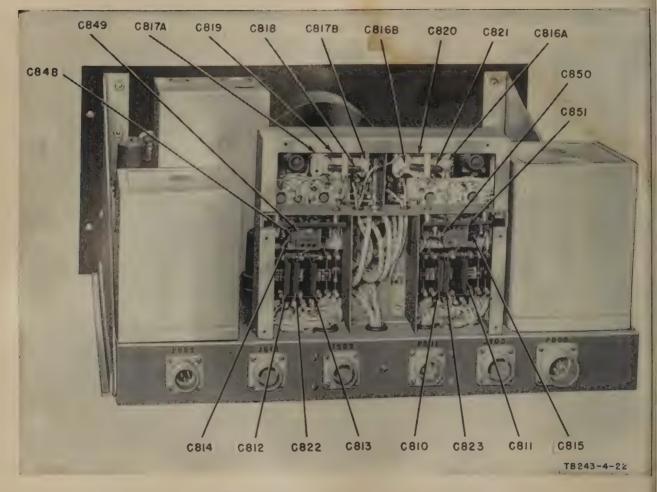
Bearing Indicator BC-1338, identification of parts, rear view.
